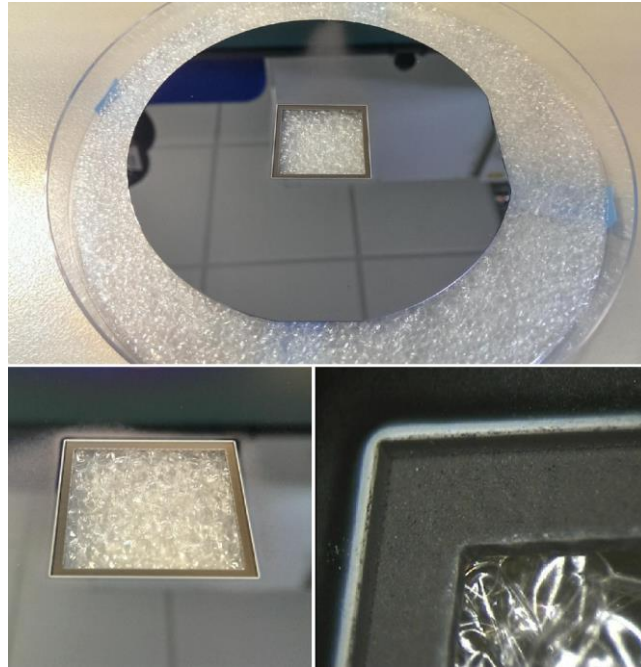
Laser machined Si wafer with square opening and detail of counter-sunk border. Laser cutting debris was removed followed by RCA-1 and RCA-2 cleaning.
